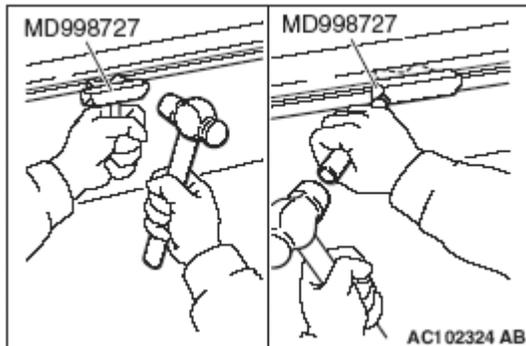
Inserting Special Tool MD998727 From Engine Oil Pan
